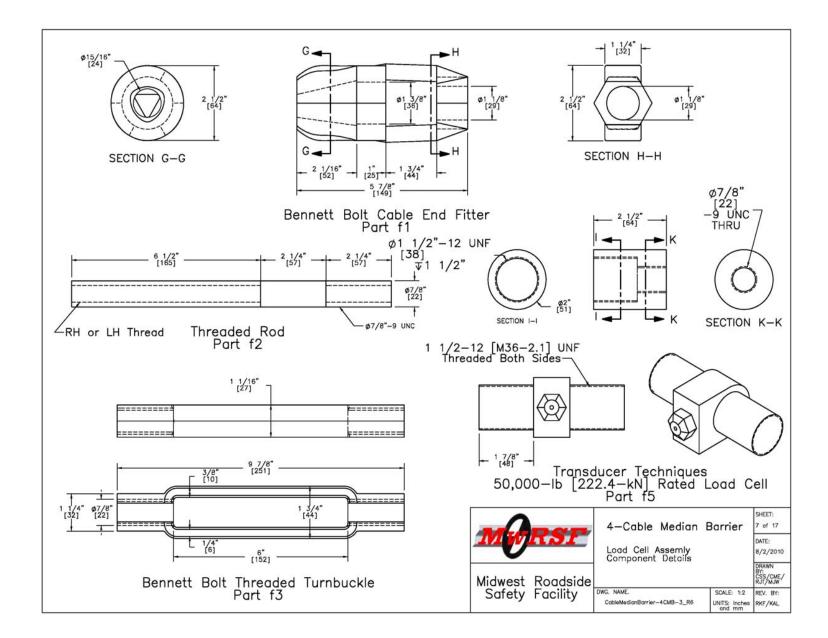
Load Cell Assembly, Component Details, Test No. 4CMB-3
